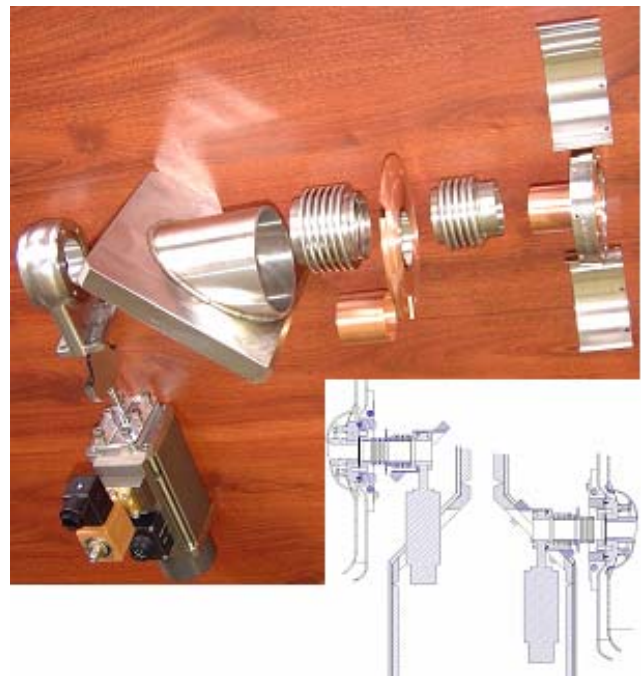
Beam valve spool components prior to braze assembly (photo) and being installed in the cryostat (inset).
